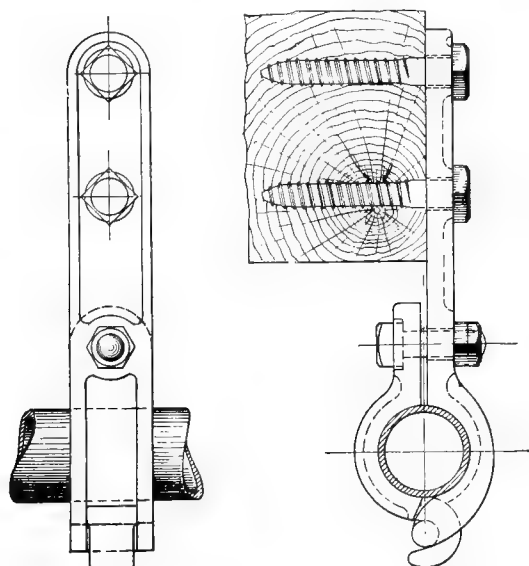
Acme Pipe Clamp for Side of Longitudinal Sill. Western Railway Equipment Company.
